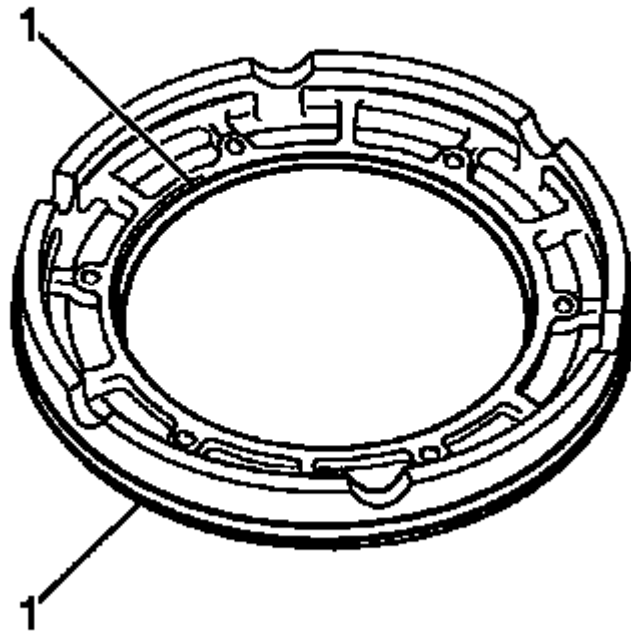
O-Rings & 1st & Reverse Brake Piston
